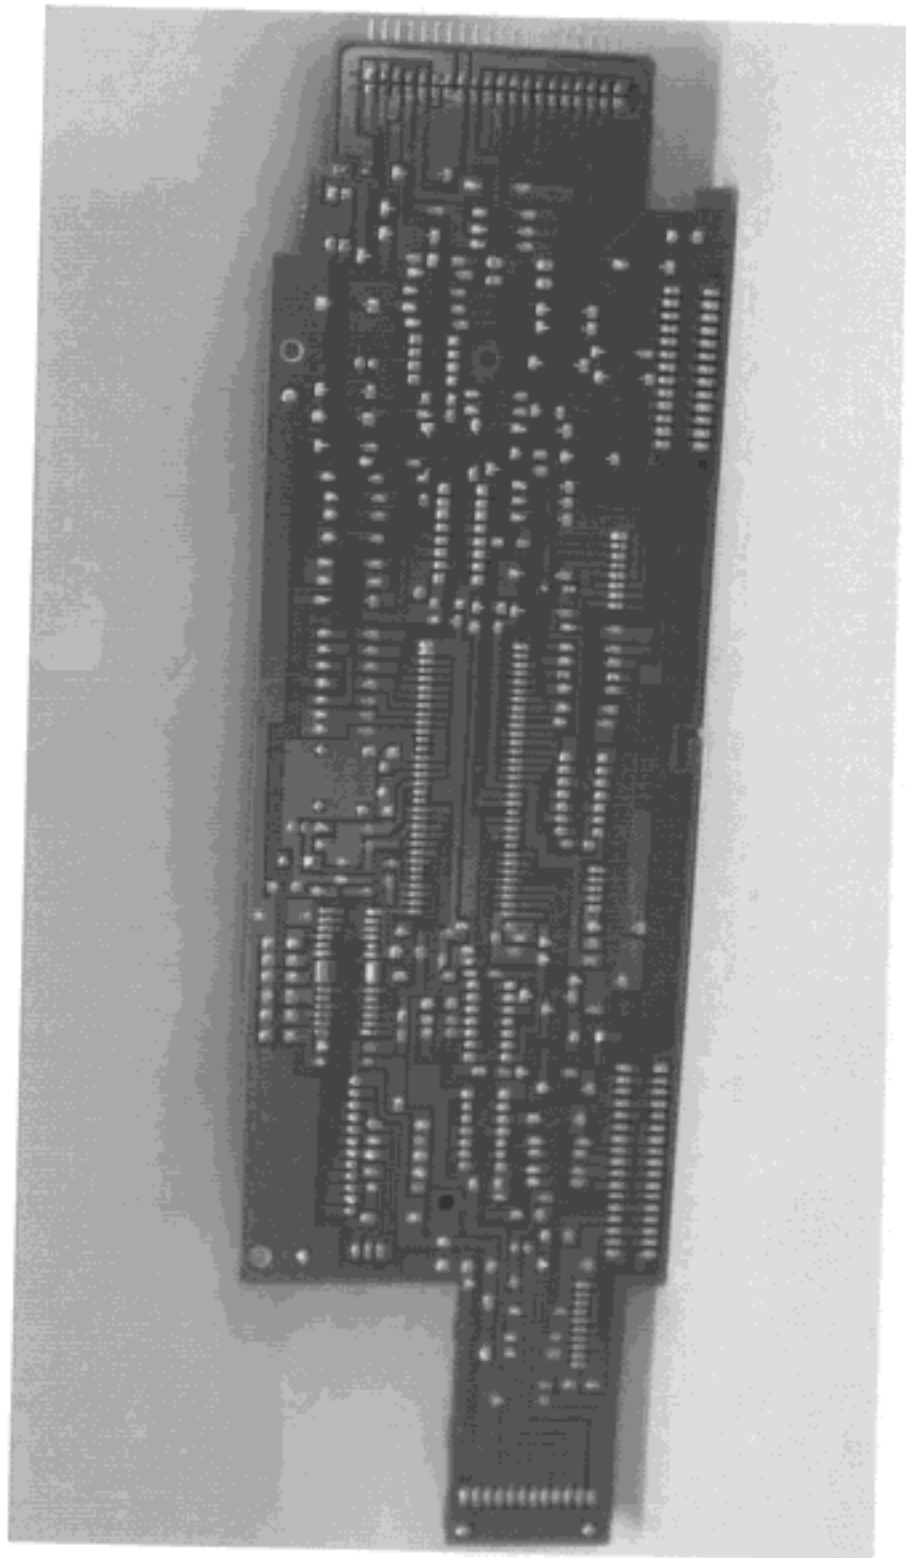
CONTROL BOARD COMPONENTS SIDE
